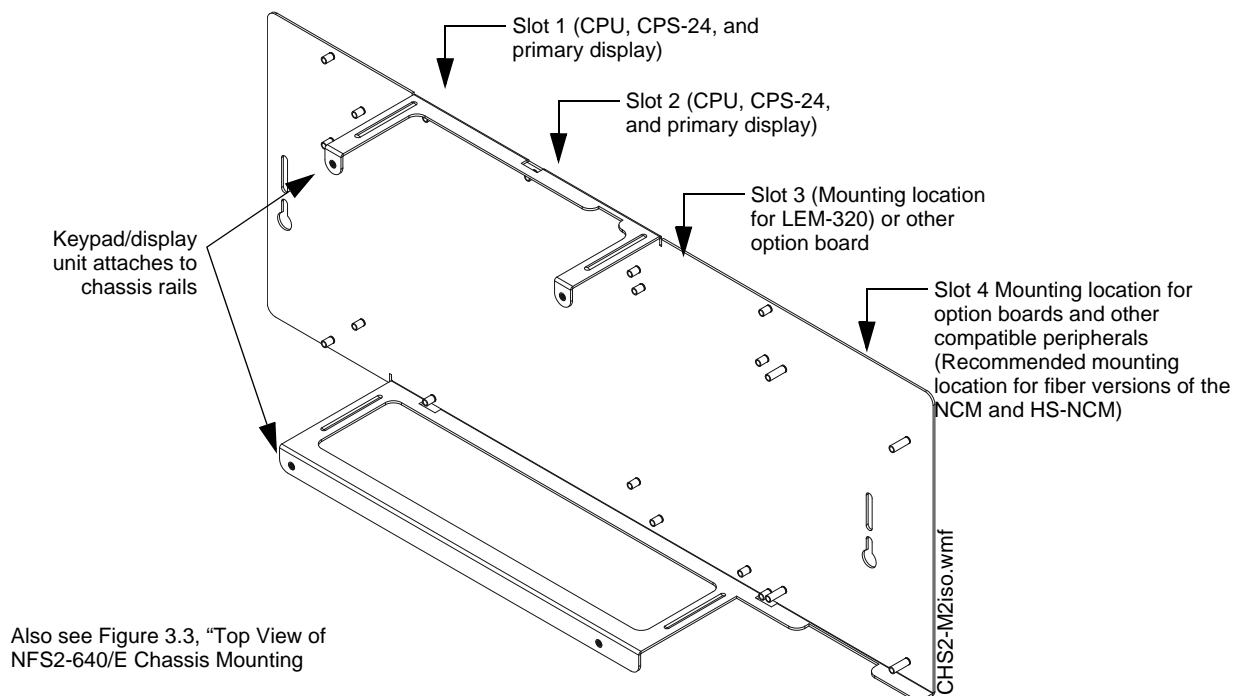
Side View of the NFS2-640/E Chassis Mounting Options
